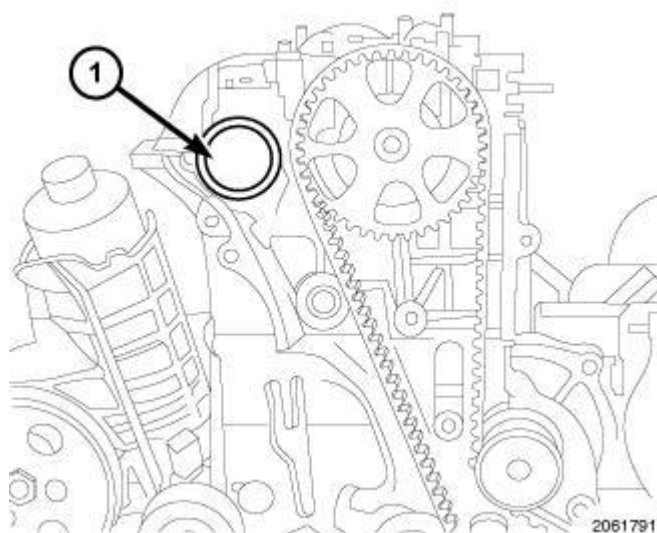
EXHAUST CAMSHAFT OIL SEAL
